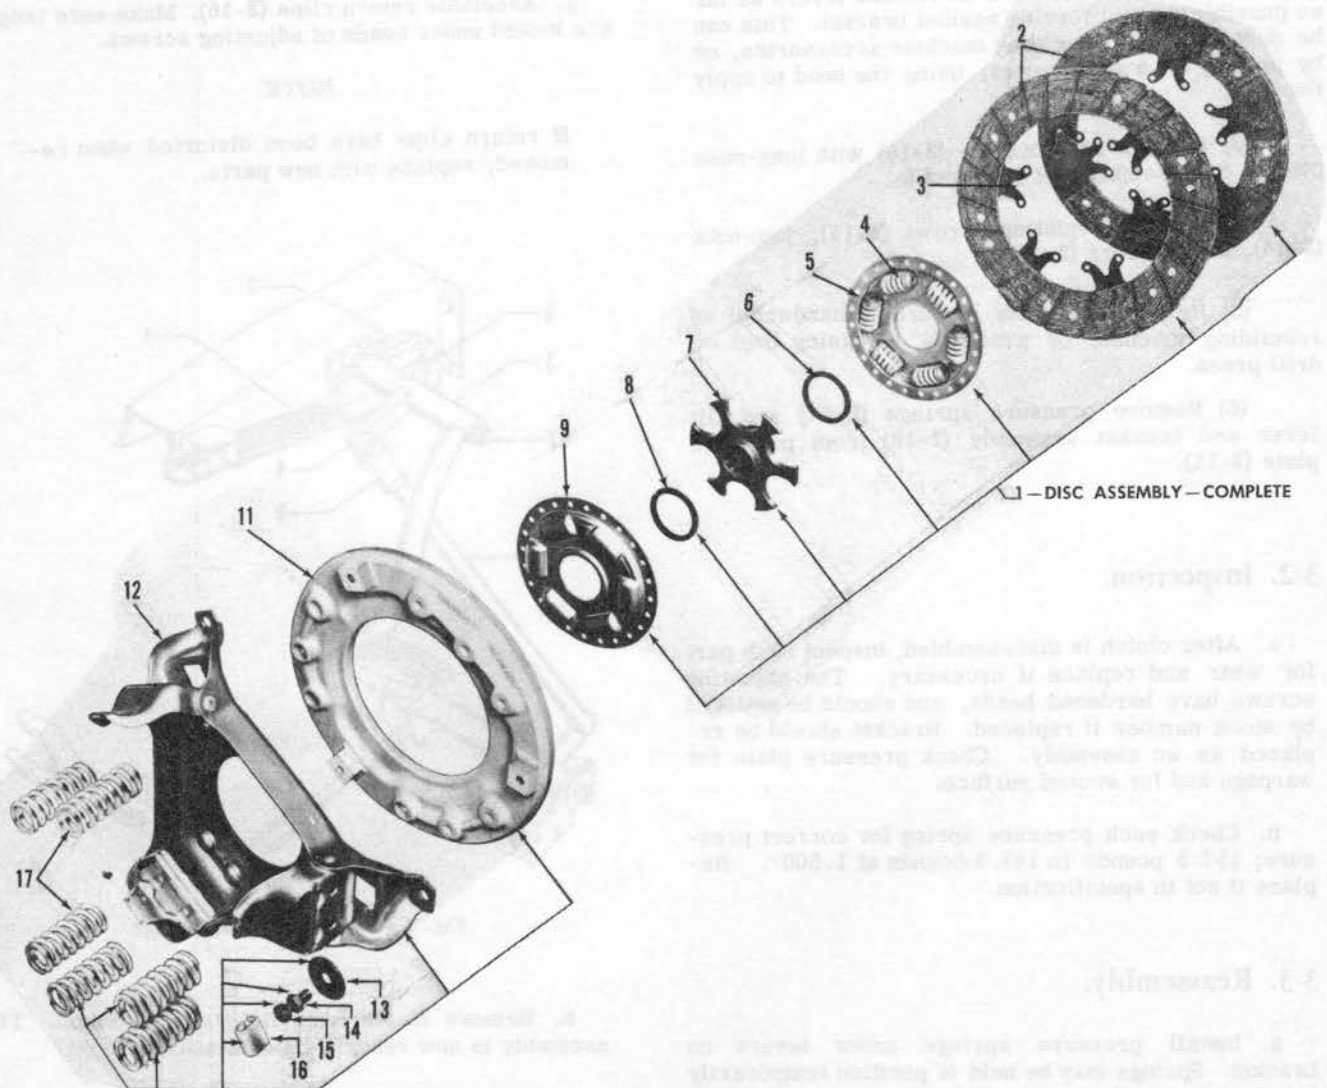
Clutch Disc and Pressure Plate Assembly
